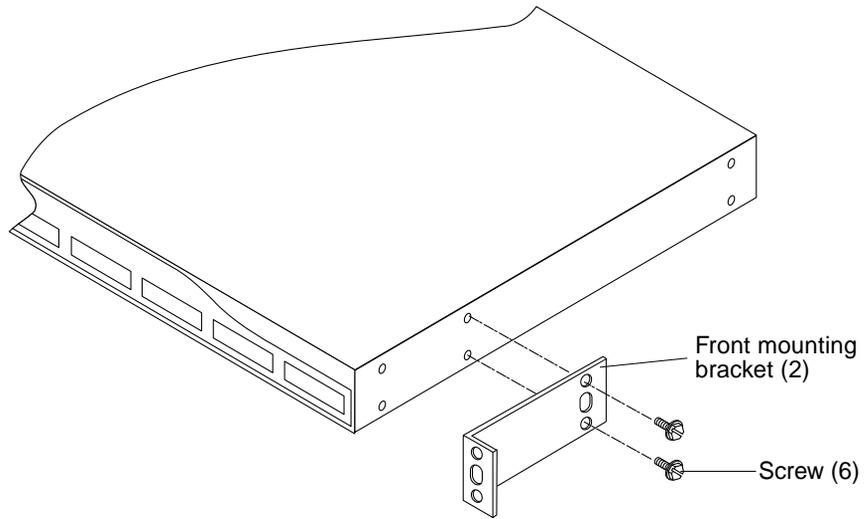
Installing the Ethernet Switch Front Bracket
